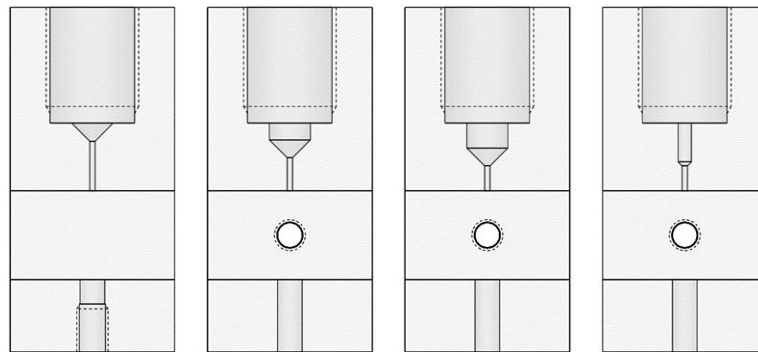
Drawings of tested injector designs. From left to right: L, M, S, and P.
